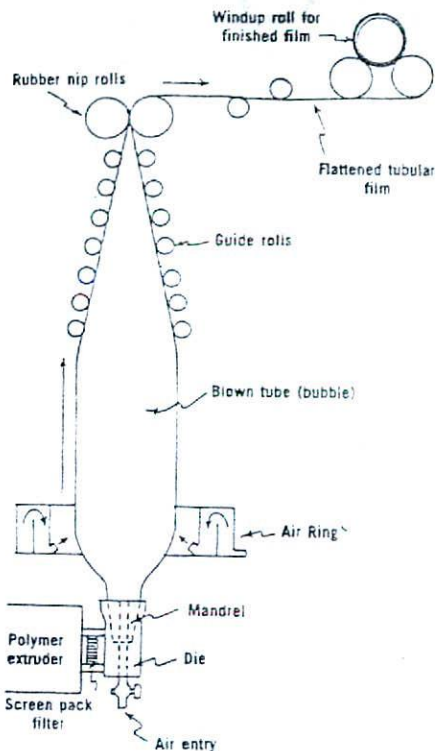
Schematic drawing of tubular film extrusion, showing film being pulled upwards and expanded into a bubble.
